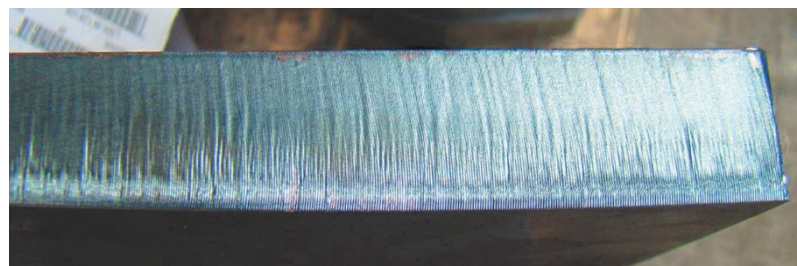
Edge of the metal sheet after laser cutting (TruLaser 5060)
